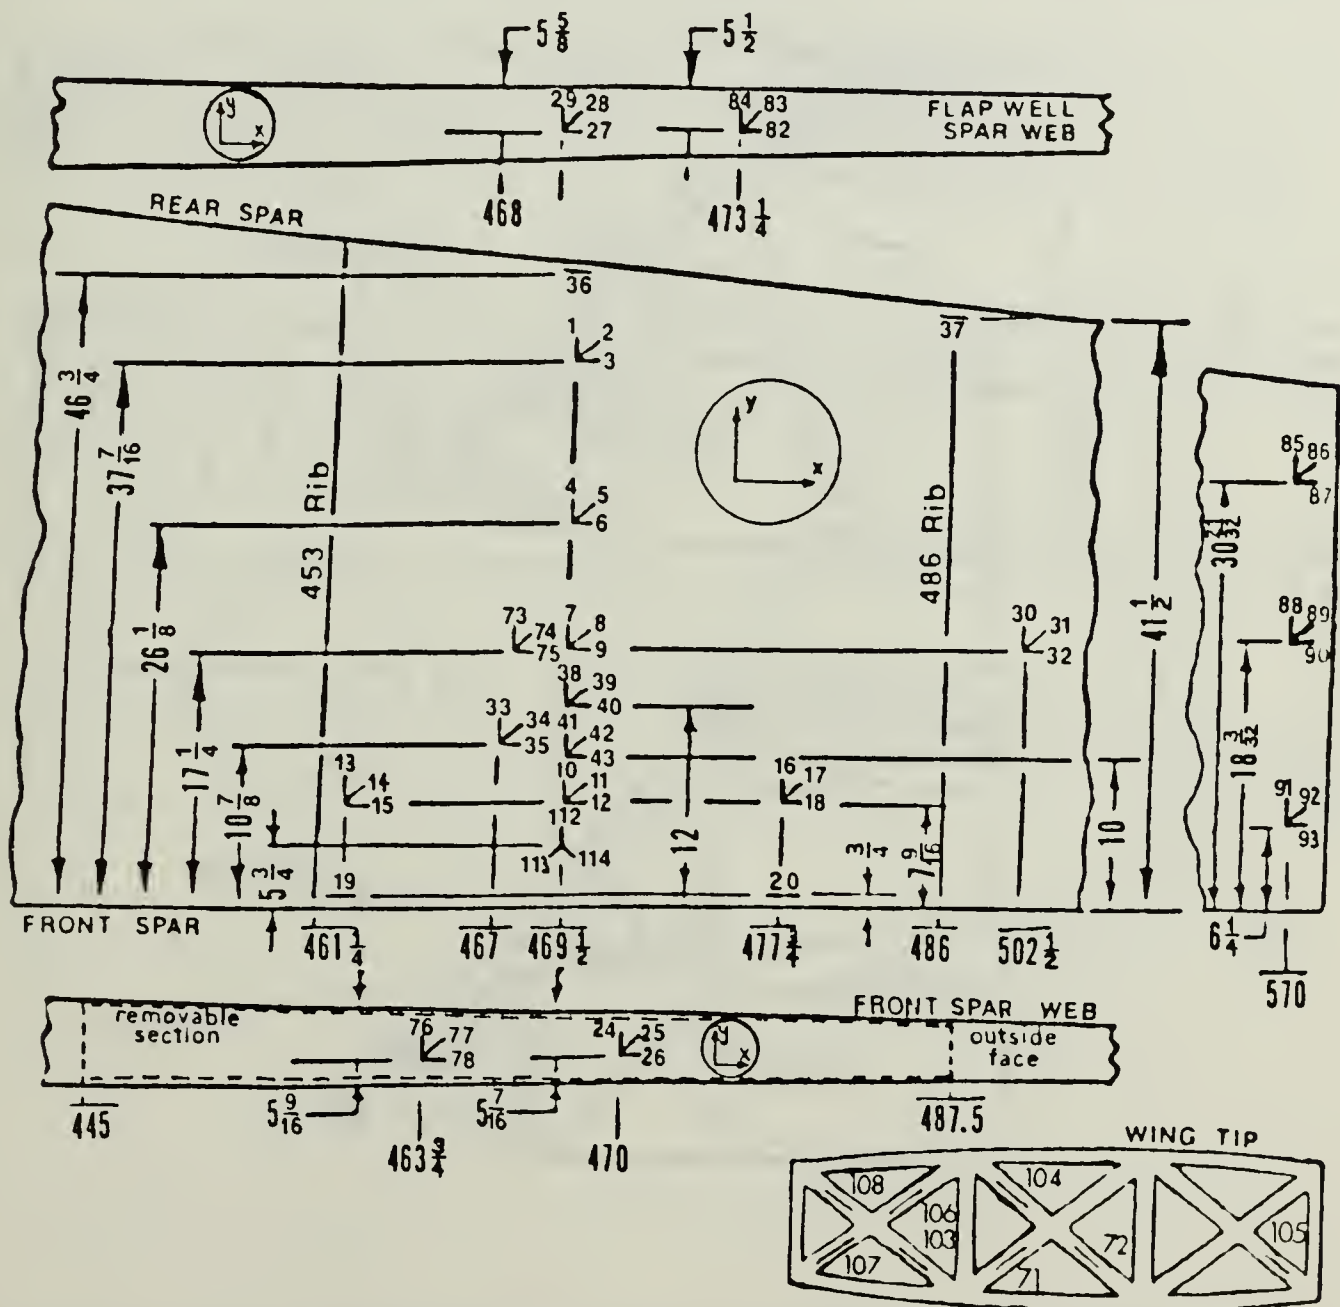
A P2V Starboard Wing, Strain Gage Locations, Top of Test Section
